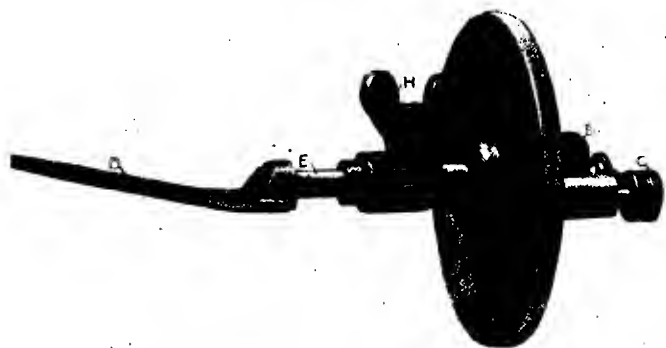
Profile view of the Larrad. A, disc; B, spirit level; C, pin; D, blade for attaching; E, shaft to be fixed parallel with the crankshaft; H, winged nut fixing disc A to shaft E.
